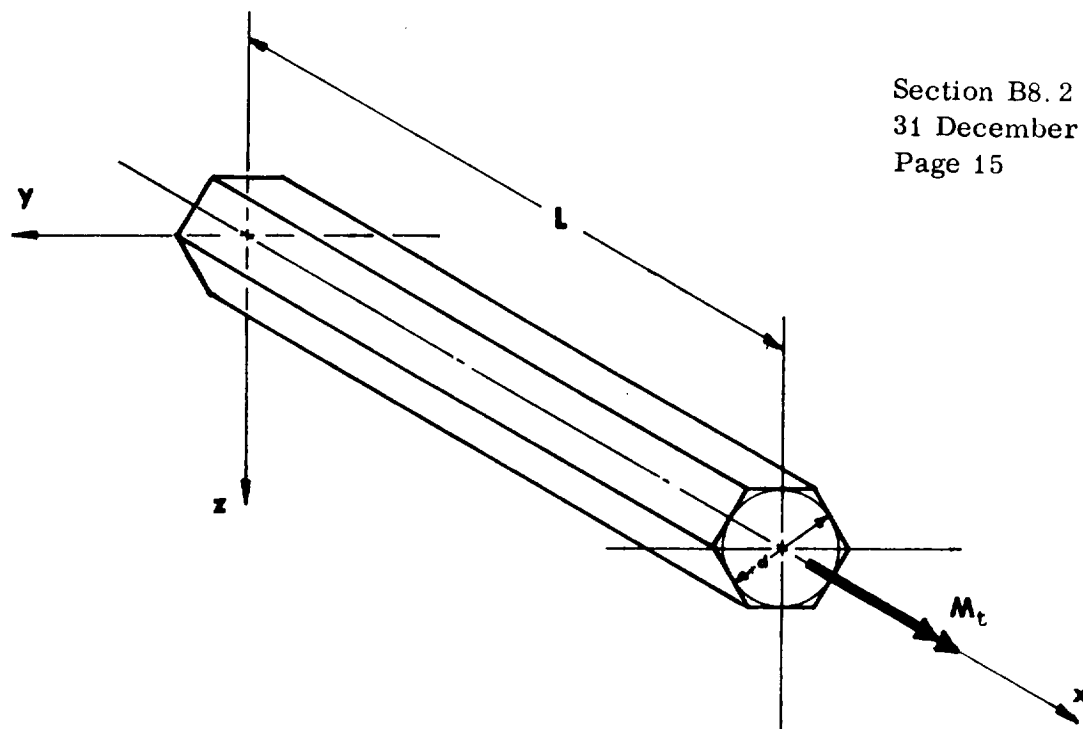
REGULAR HEXAGONAL CROSS SECTION
